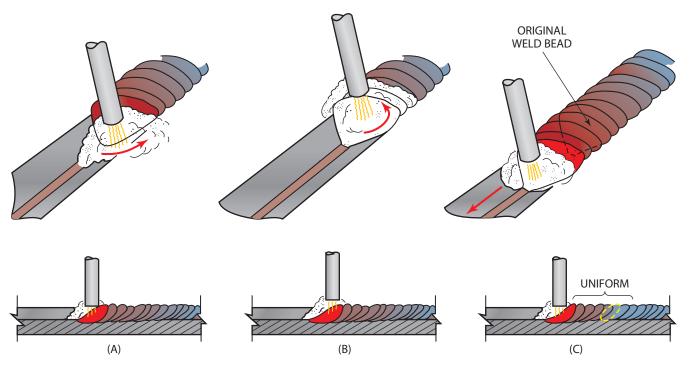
When restarting the weld pool after the root has been heated to the melting temperature, move the electrode upward along one side of the crater (A). Move the electrode along the top edge depositing new weld metal (B). When the weld is built up uniformly with the previous weld, continue along the joint (C).
